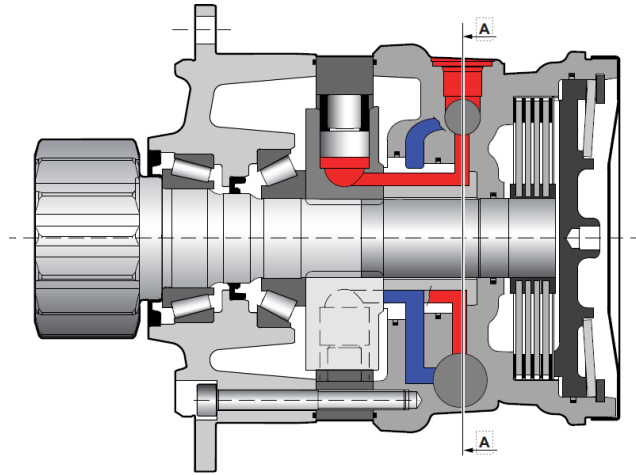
Heavy duty radial pistons hydraulic motors with disk brake for swing drive
